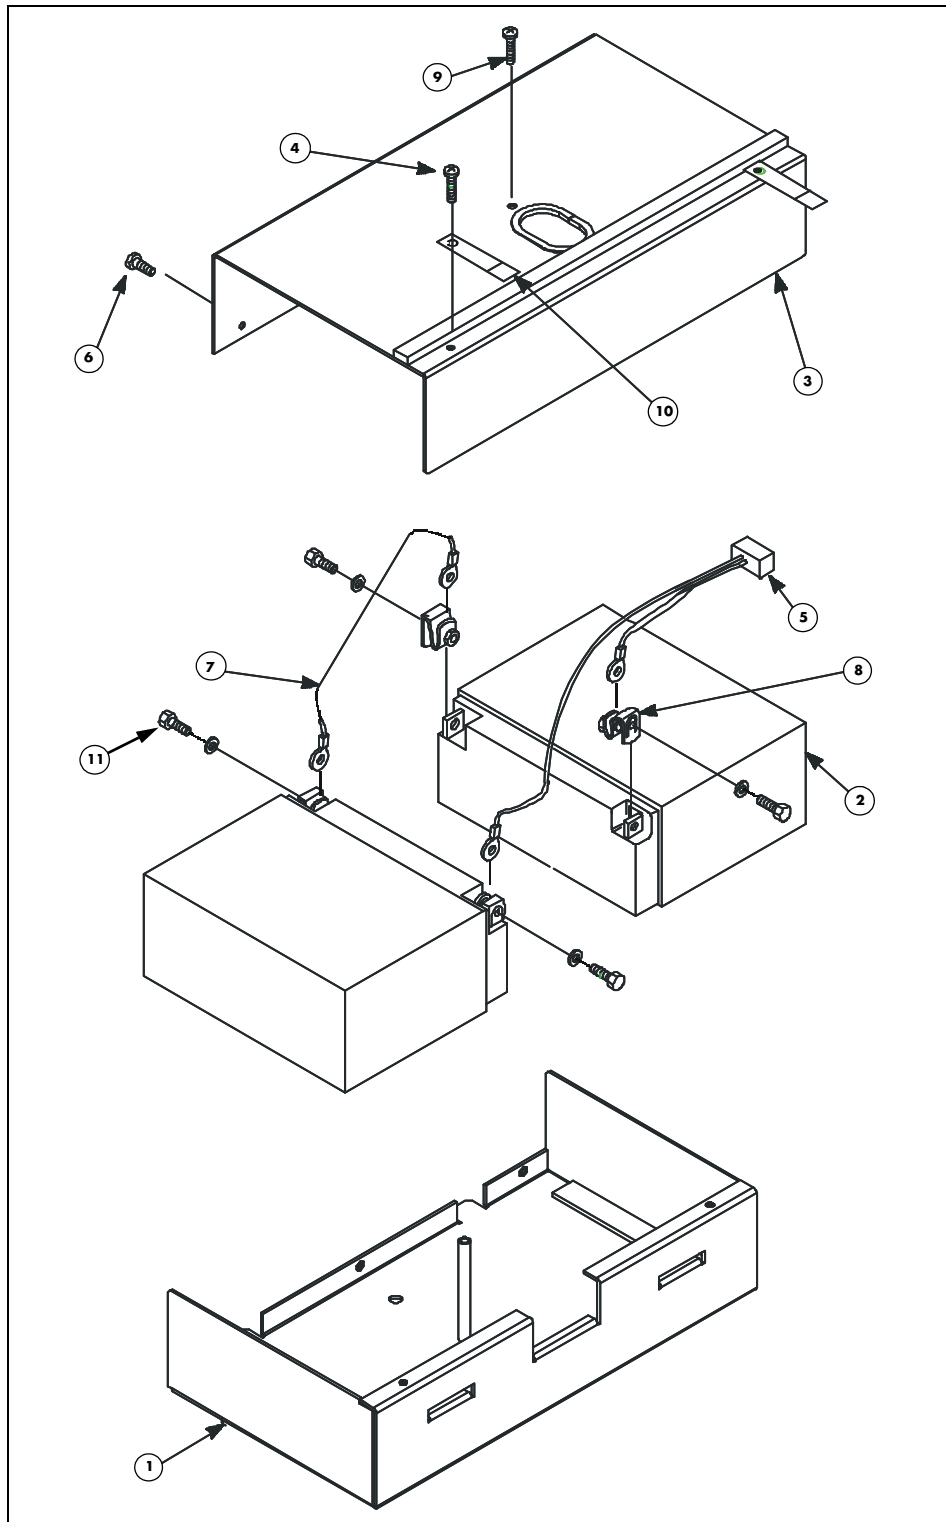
Isometric Drawing, UTS Battery Assembly
